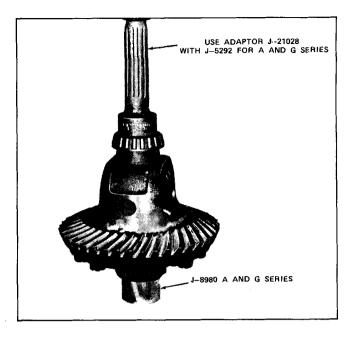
A-23 Installing Right Differential Side Bearing - A and G Series
